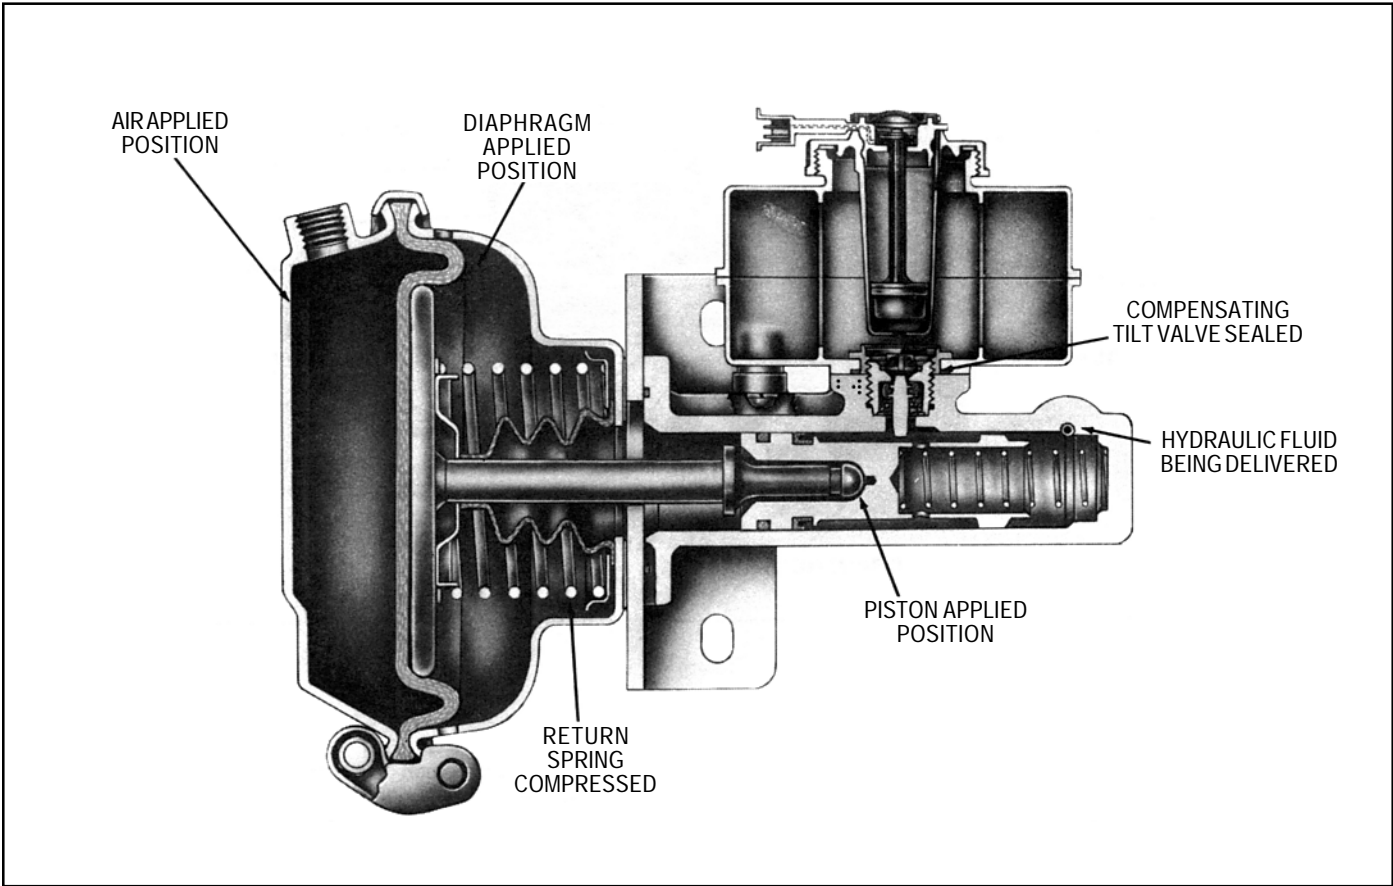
CUTAWAY VIEW OF APPLIED POSITION
